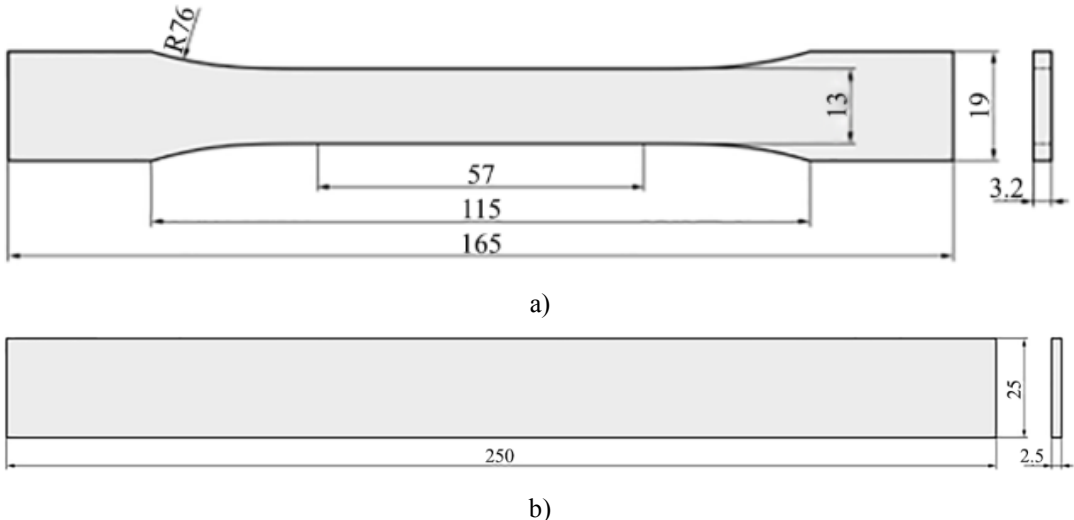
Shape of specimen according to standards: a) ASTM D638-14; b) ASTM D3039
